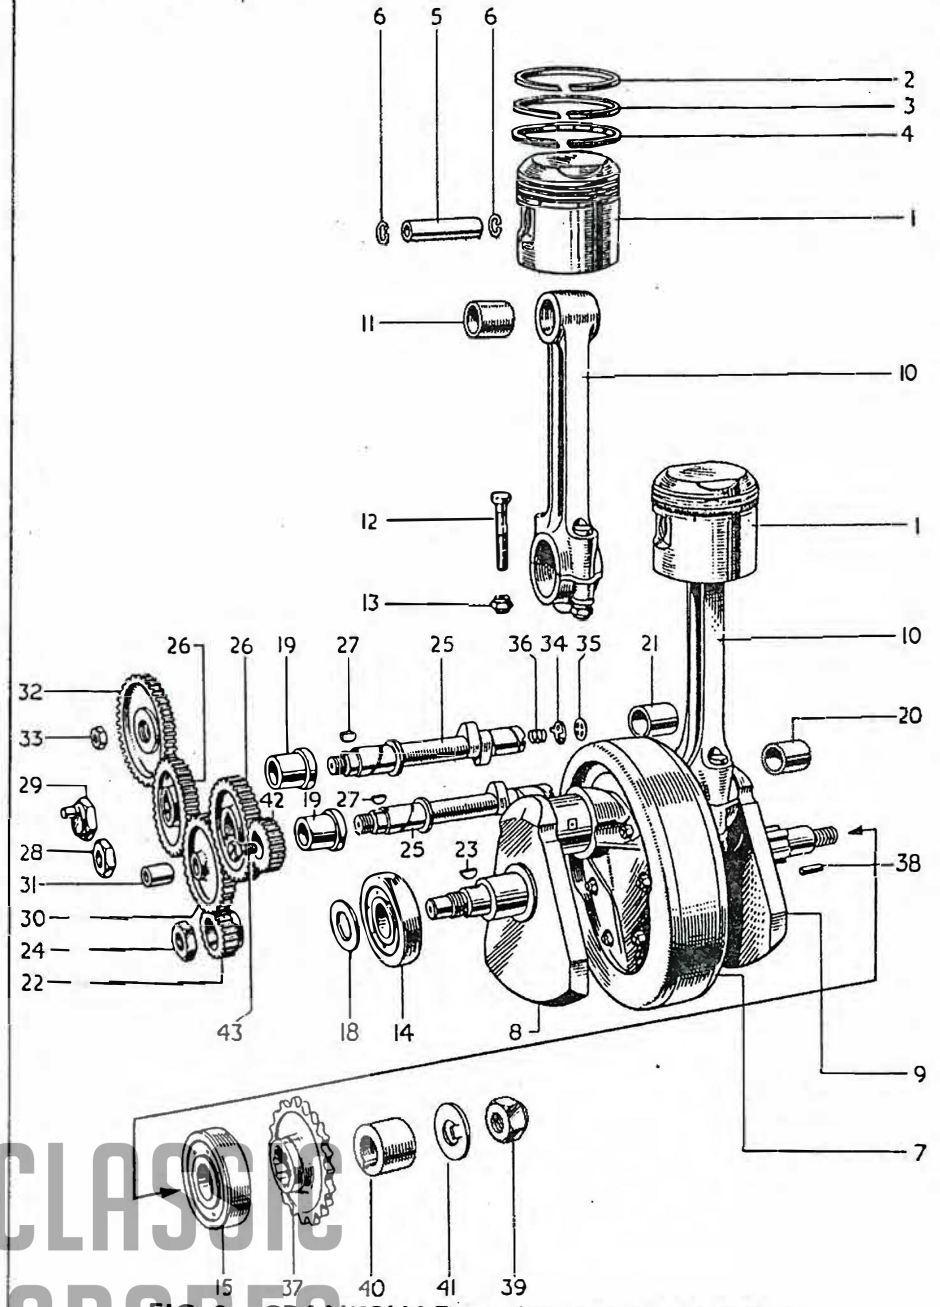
CRANKSHAFT, CONNECTING RODS, PISTONS, TIMING GEARS, etc.
